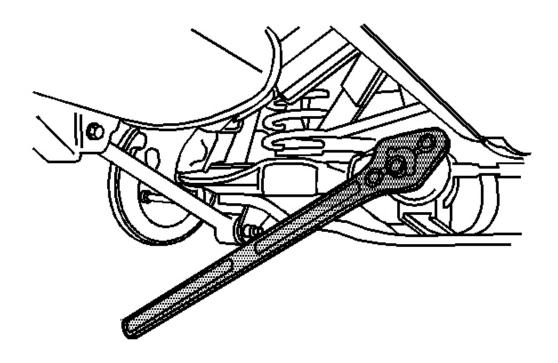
Holding Pinion Yoke With Special Tool Courtesy of GENERAL MOTORS CORP.
